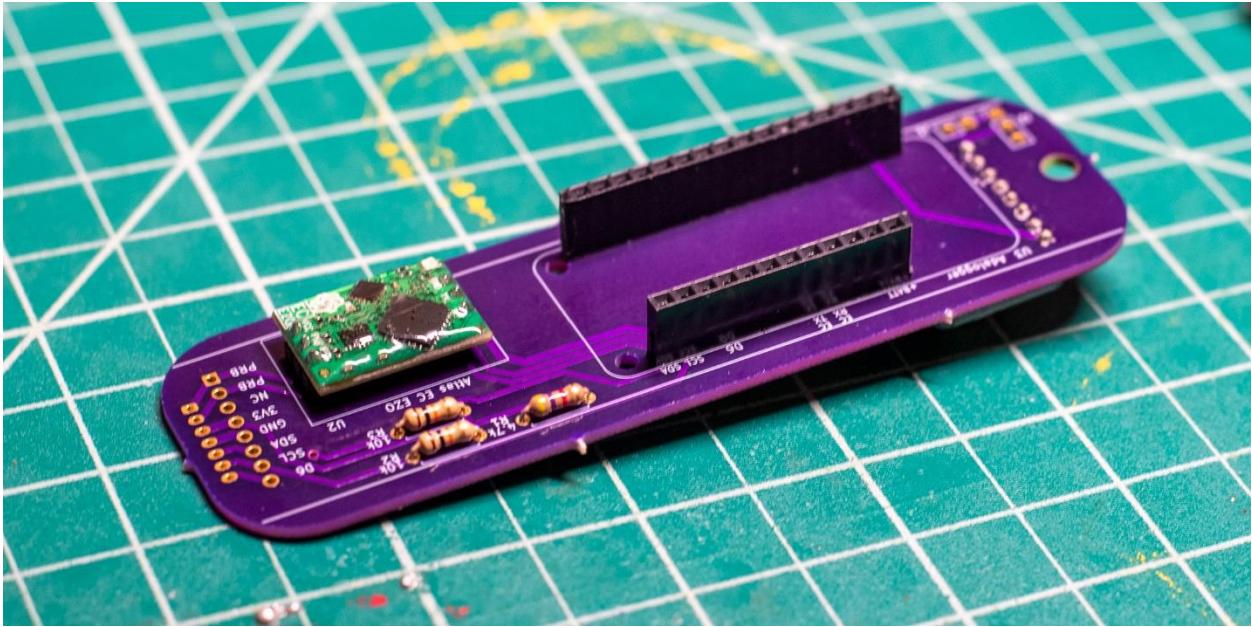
Custom carrier board with Atlas EZO circuit and resistors soldered to the topside.
